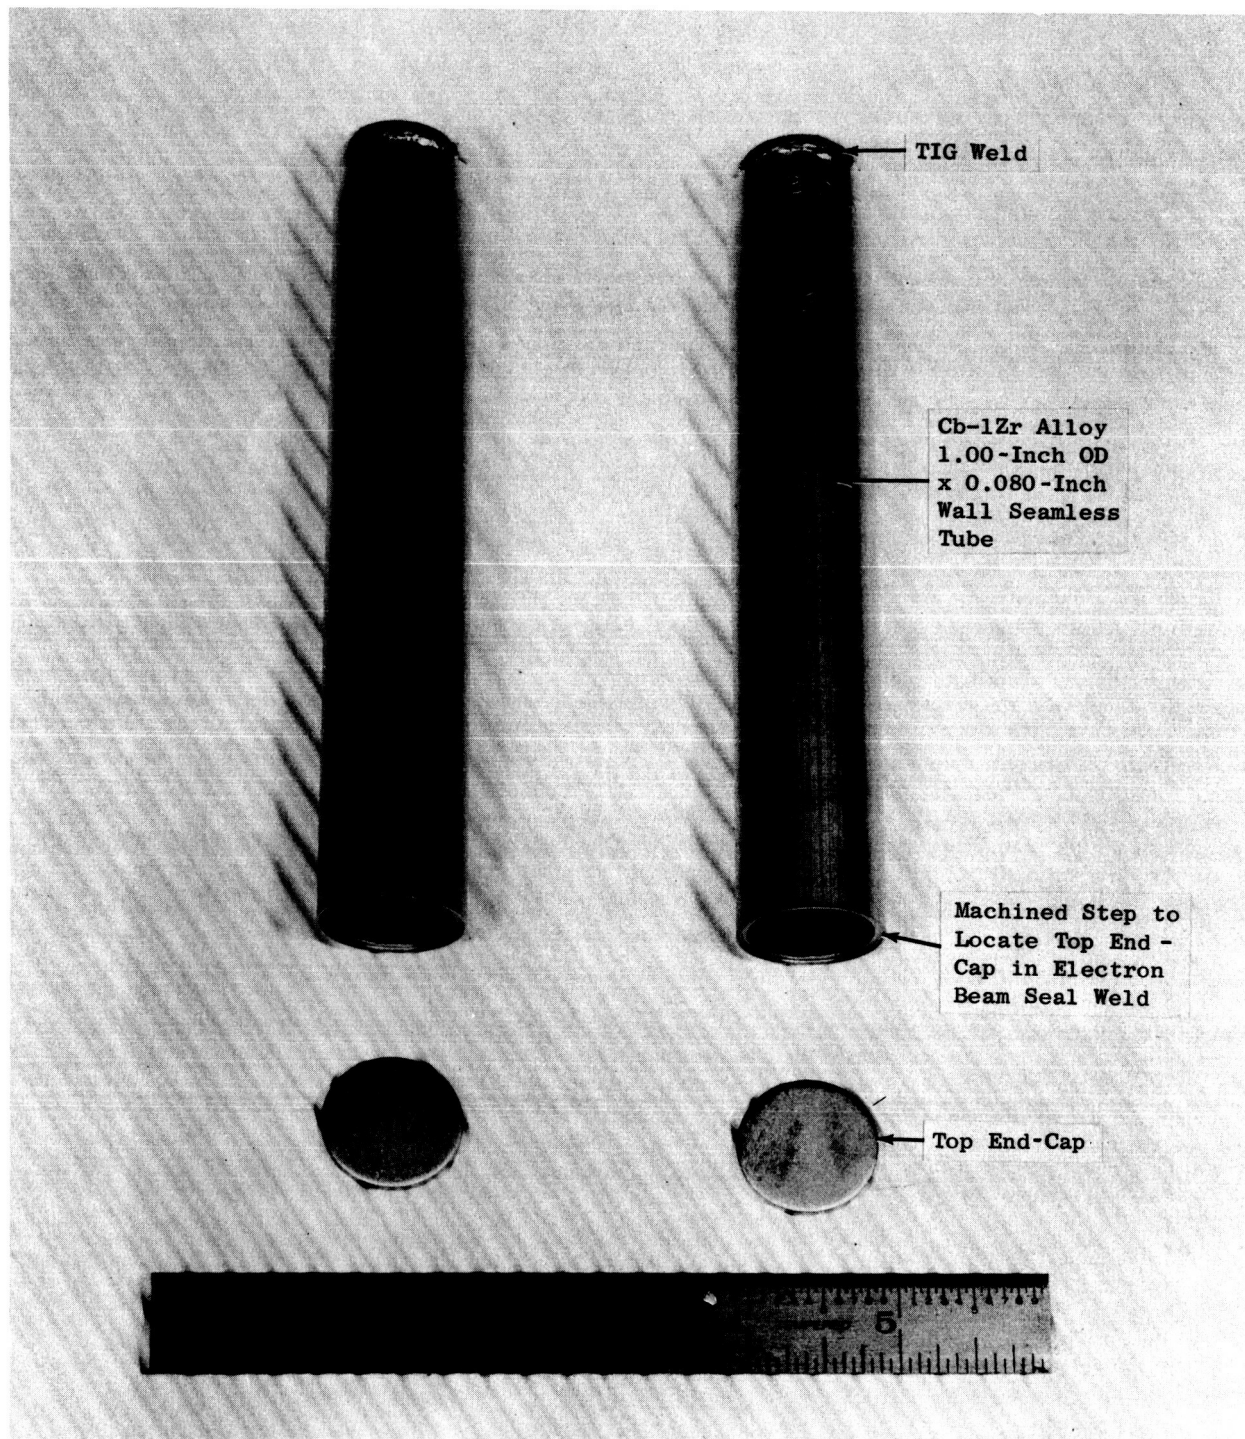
Machined and Cleaned Cb-1Zr Alloy Capsules After TIG Welding Bottom 0.080-Inch Thick End-Cap to 1-Inch OD x 0.080-Inch Thick Wall Seamless Tube. Note Electron Beam Weld-Prep on Top End of the Tube.
